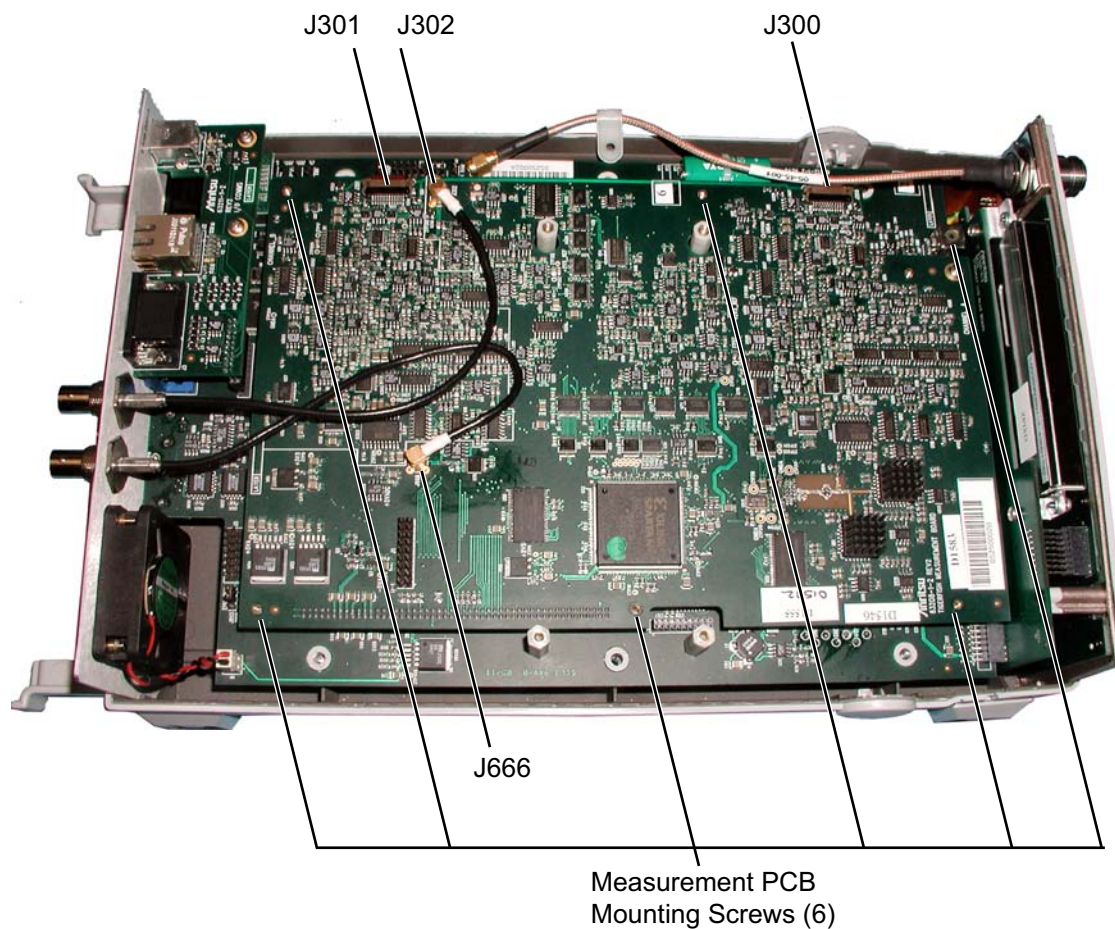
Measurement PCB Removal – ML248xB and ML249xA
